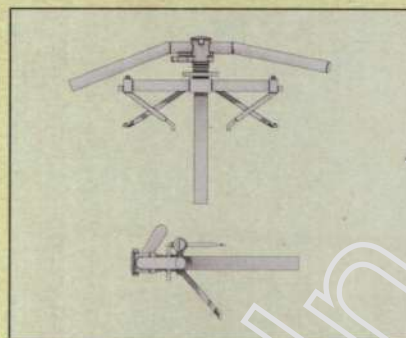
Check the alignment of parts A.11 and A.12 during assembly
